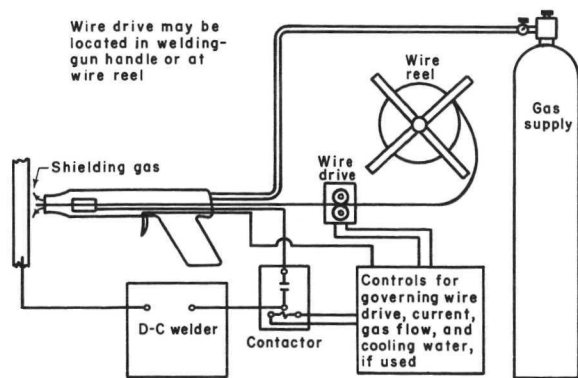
Gas-metal-arc-welding process.
